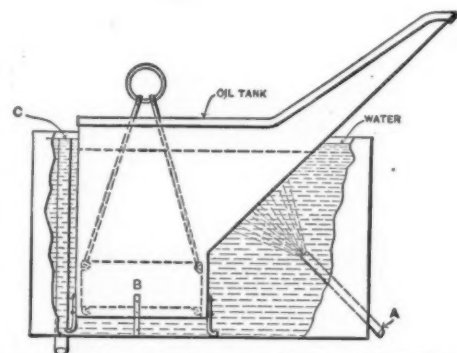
OIL TANK FOR HARDENING HACK-SAW BLADES.
